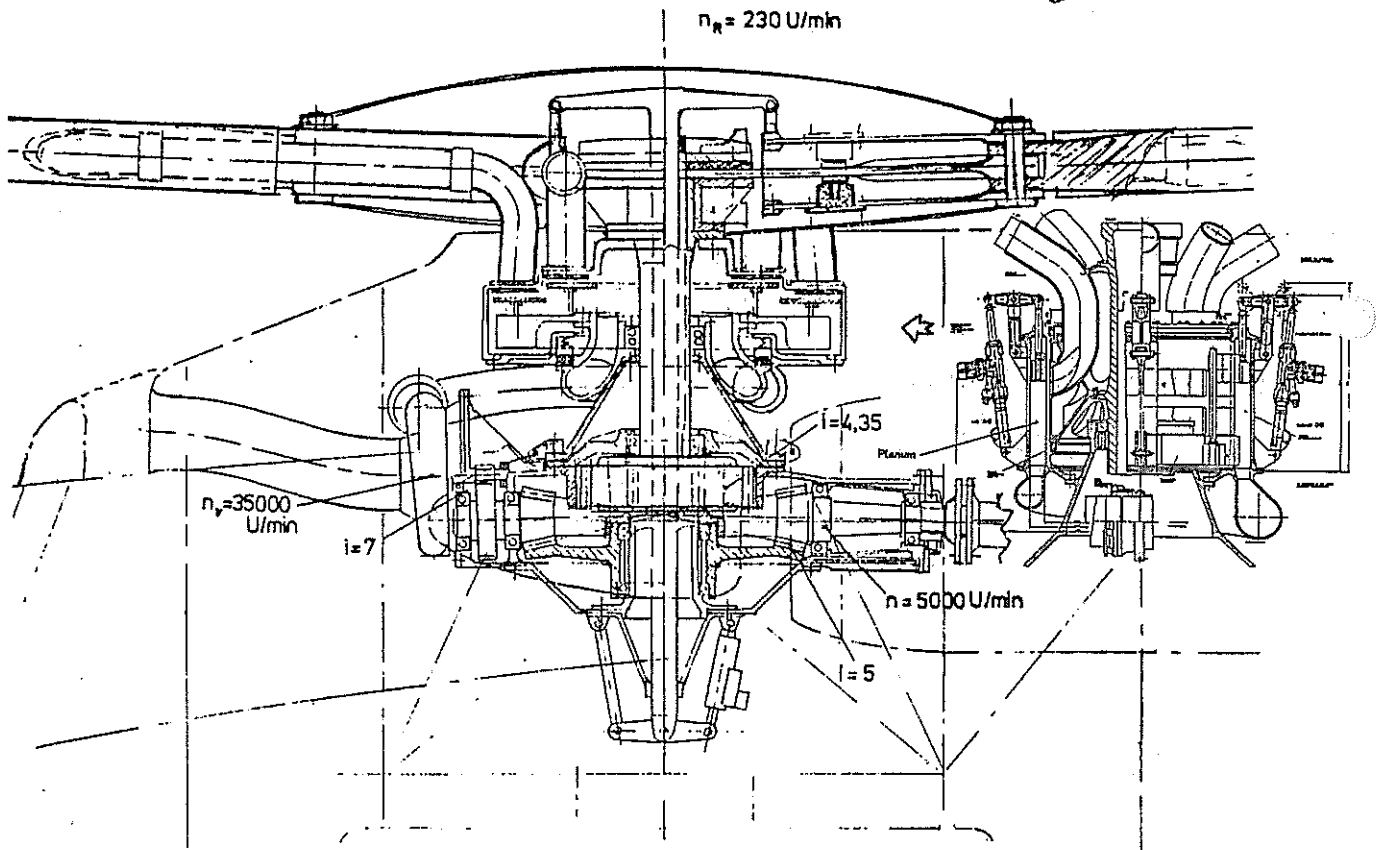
Rotorhead, Pneumatic Control System, Main Rotor Gear Box
